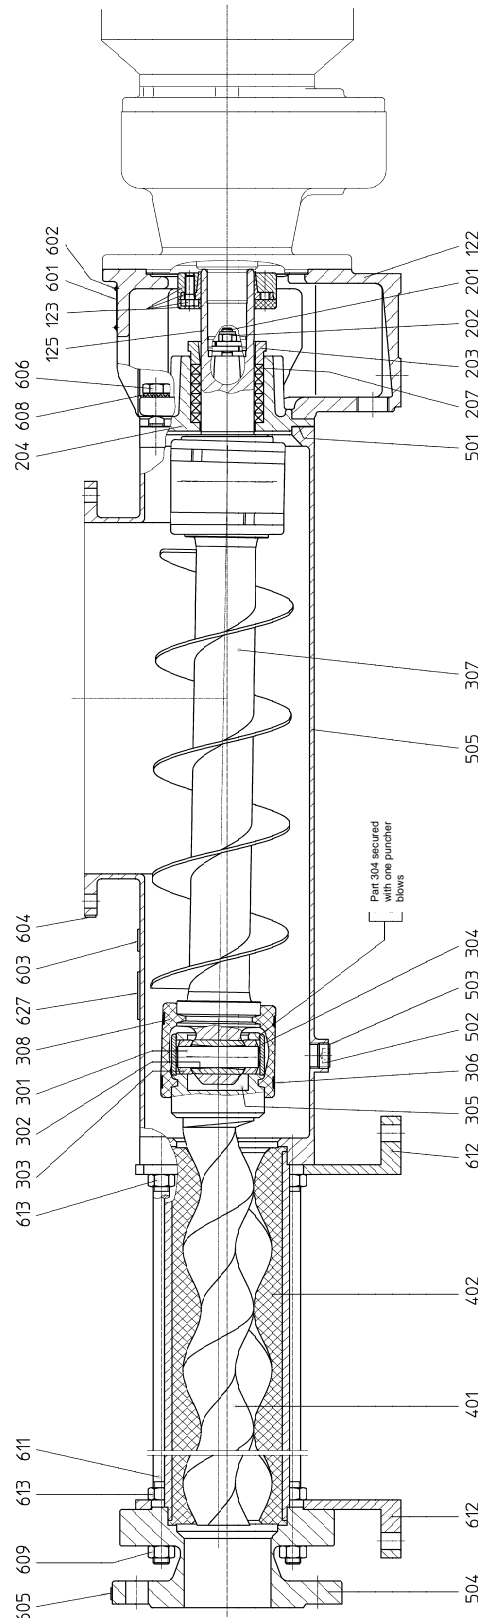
Sectional drawings of series AEB.H; ZE construction type
